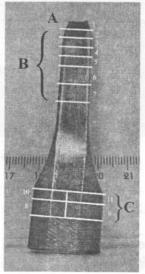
A sample of 35G2 steel fractured under axial tension showing the schematic of test sample cutting. Upper part (zone A) - zone of fracture, lower part (zone C) - sample grip zone in the test bed.
